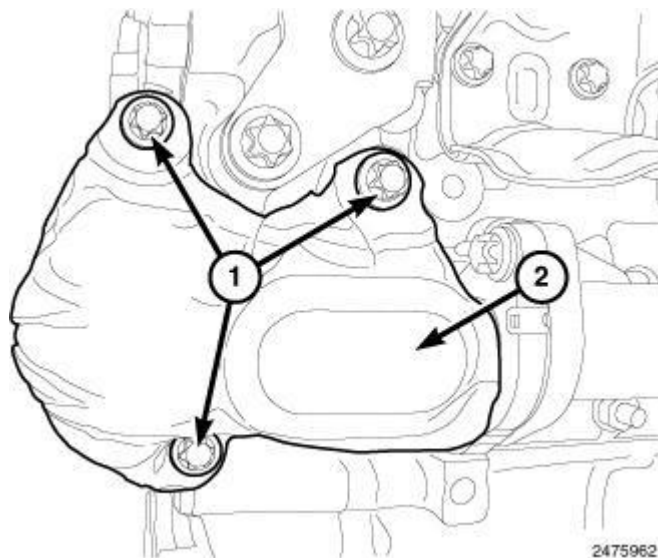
Bolt Securing CAC Tube To Glow Plug Module
